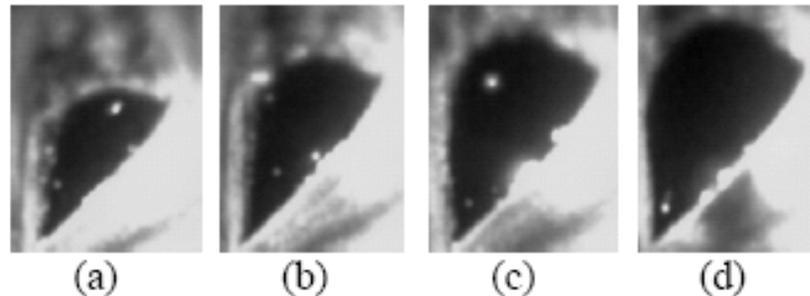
, Weld pools with different welding current. Speed: 3.86 mm/s; laser beam angle: 52 degree, 1 mm stainless steel, (a) 33.1 A, (b) 35.3 A, (c) 37.7 A, (d) 39.5 A
